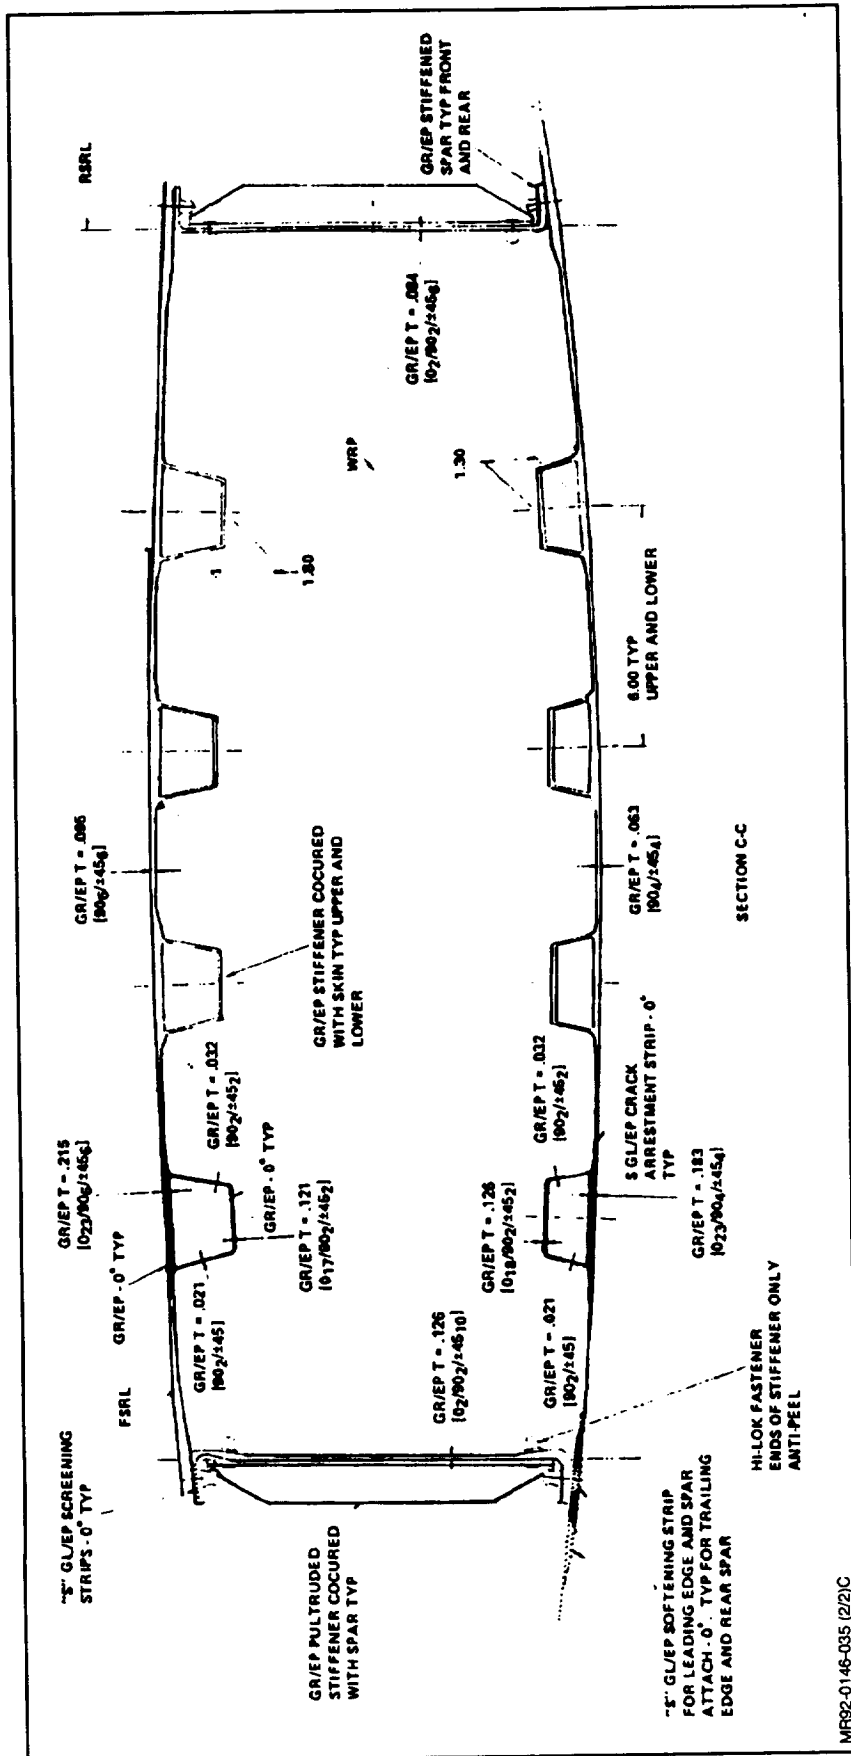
Multi-Rib Design (Sheet 2 of 2)
